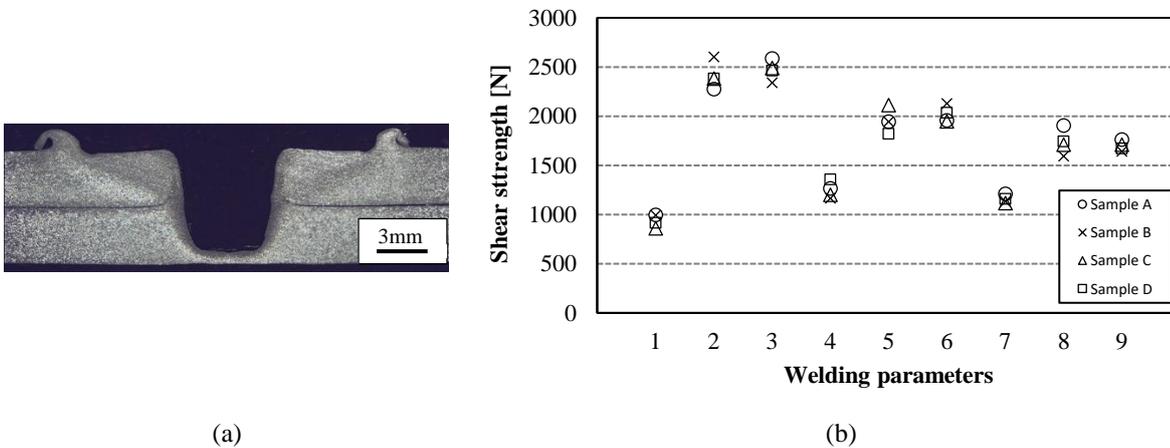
(a) Cross section macrograph of a welded joint and (b) shear strength.
